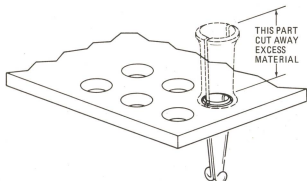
HOW FLUSH-MOUNT SOCKET CAN BE MADE by removing the top part of a miniature tubular terminal and peening over.
